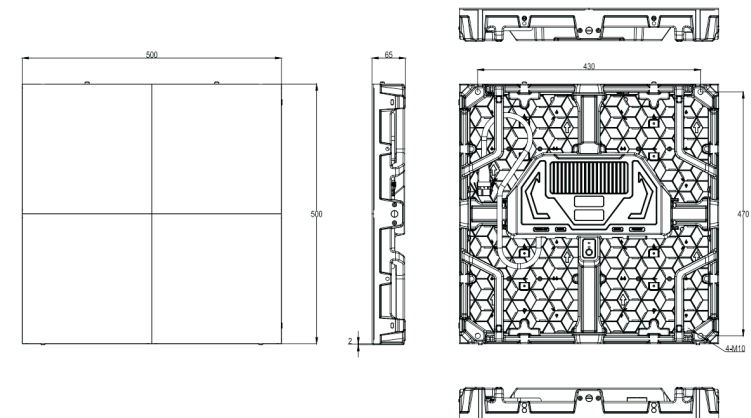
Outline drawing of Mwall wire connection power supply cabinet
